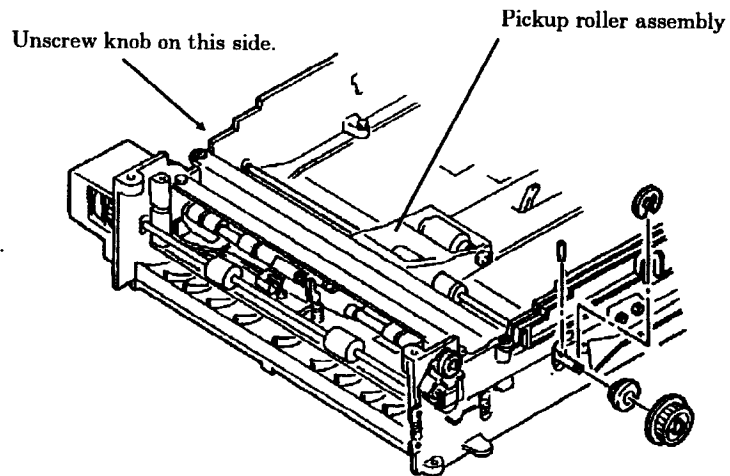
REMOVING SCREWS FROM THE FRONT GUIDE ASS'Y
